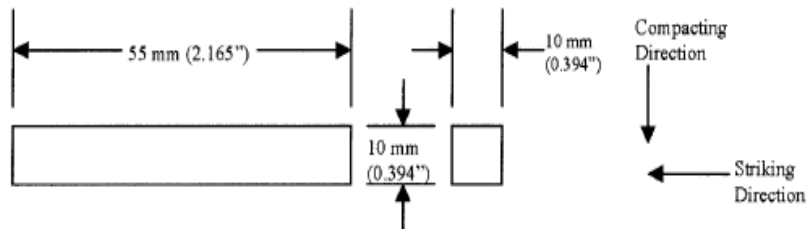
Izod (Cantilever-Beam) Impact Test Specimen, Type D
